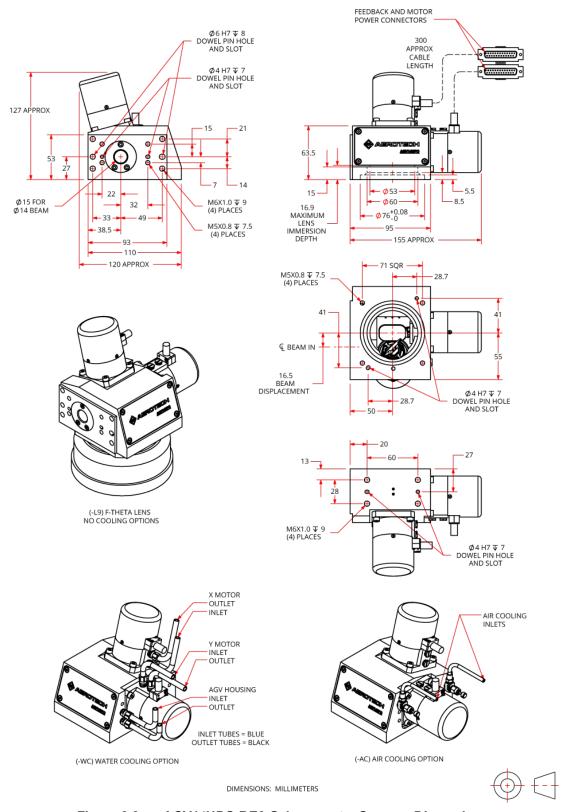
AGV14HPO-BE2 Galvanometer Scanner Dimensions
